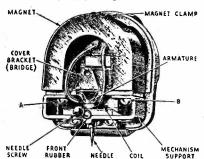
The parts composing the pickup are marked. Adjustments are made at "A" and "B"
